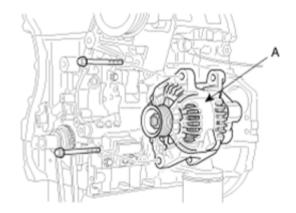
Identifying Alternator Courtesy of KIA MOTORS AMERICA, INC.
